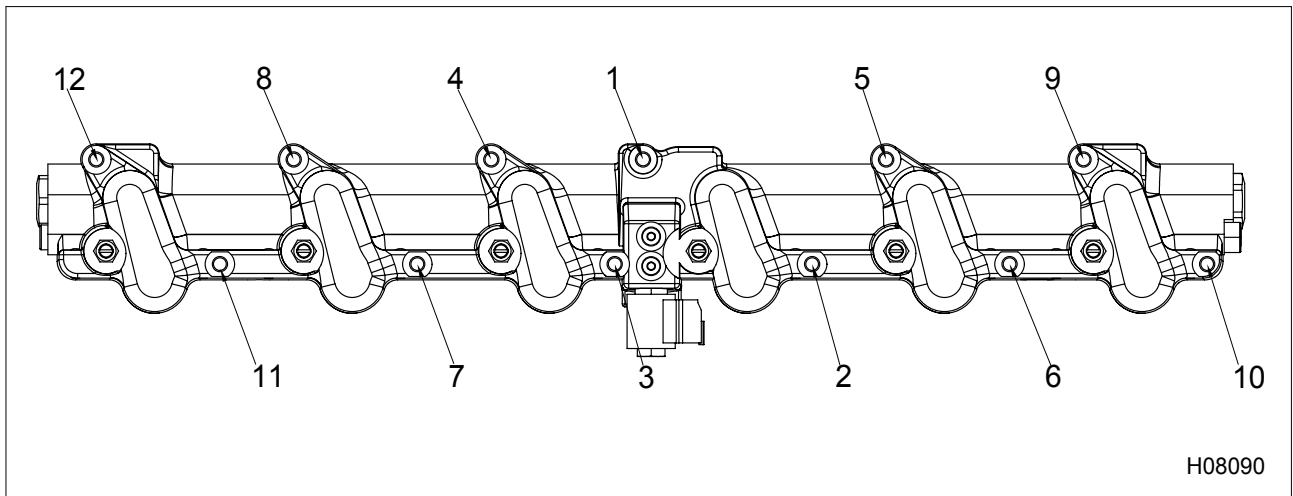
High-pressure oil rail bolt torque sequence (typical)
